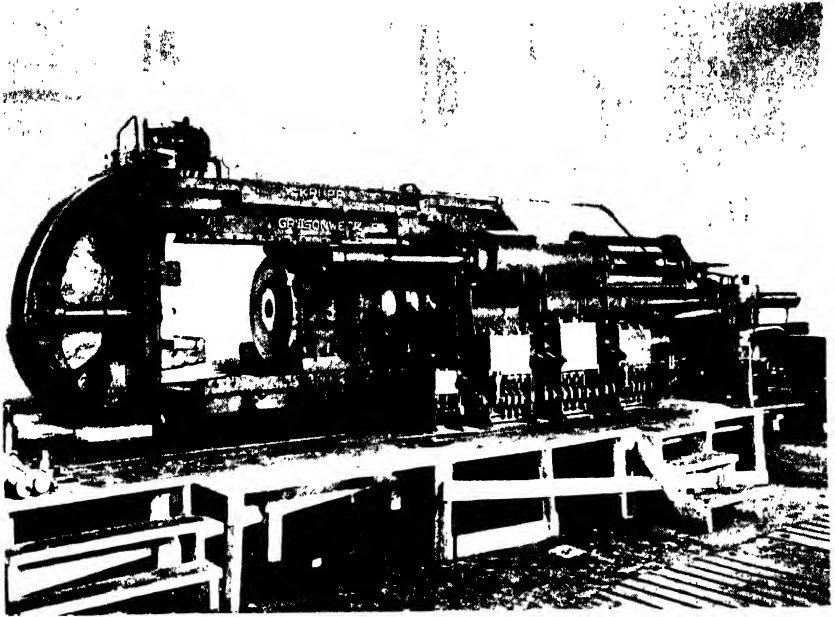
Krupp press of unorthodox design, with cast steel yoke frame and movable container, capable of being adapted to work by the inverted process.
